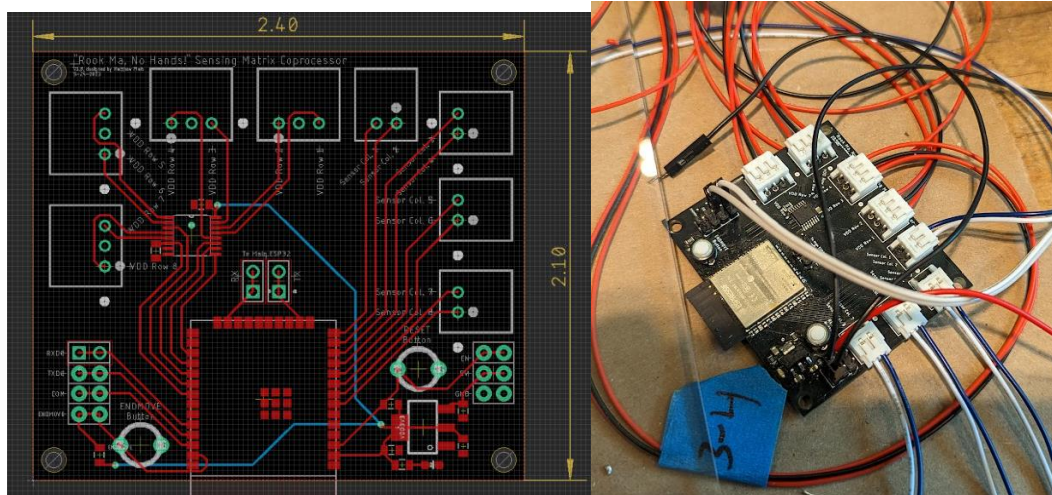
Sensing coprocessor PCB (left) and completed board (right)
